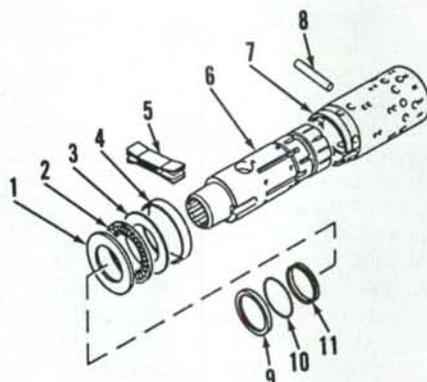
Exploded view of steering valve spool, sleeve, bearings and seals.
